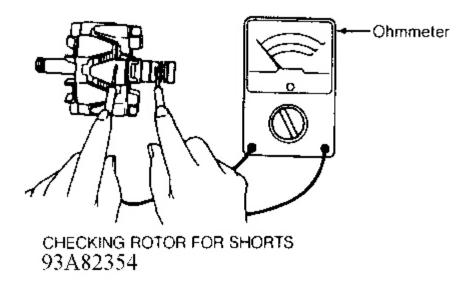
Testing Generator Stator, Rotor & Brushes (4 Of 5) Courtesy of MAZDA MOTORS CORP.
